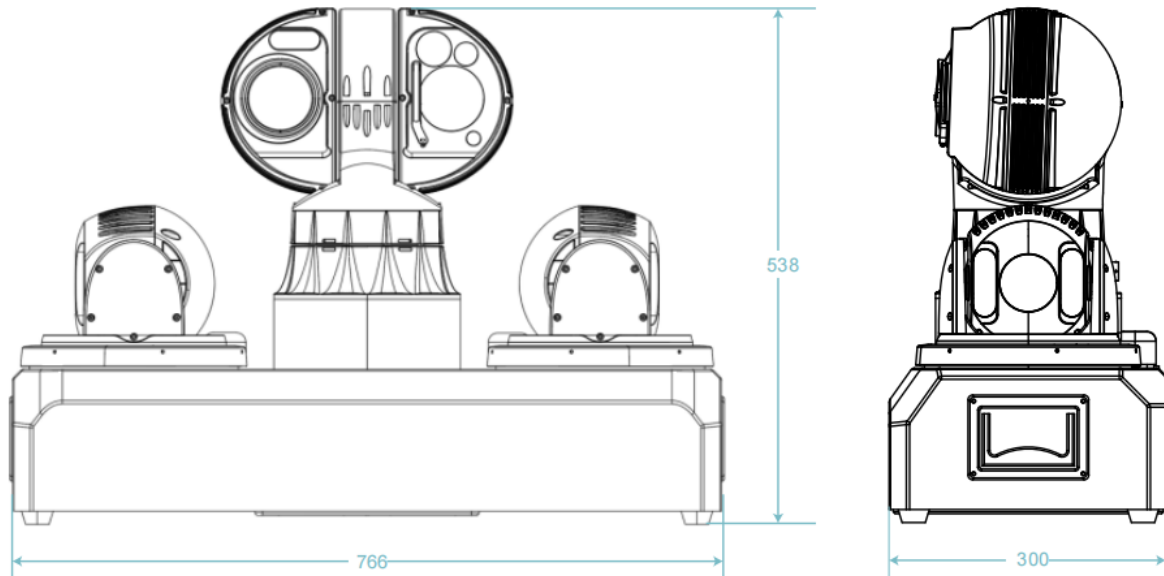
Dimensions: 766mm × 300mm × 538mm (±2mm)
